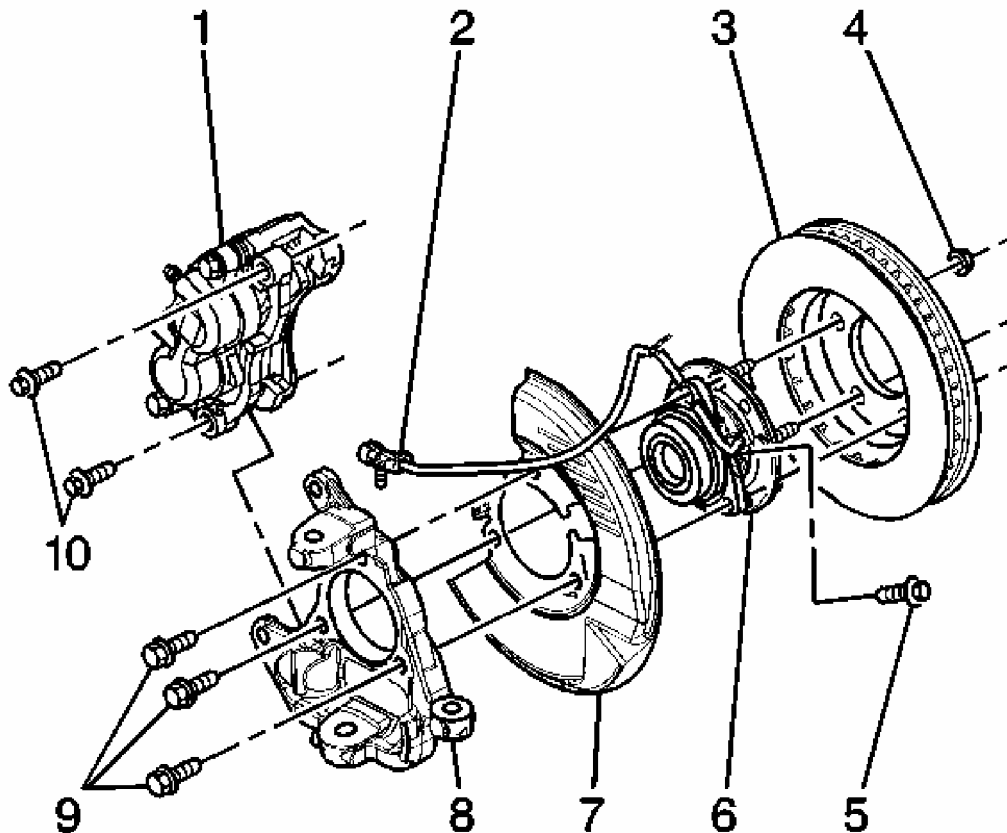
Locating Wheel Speed Sensor (4WD Pickup)
